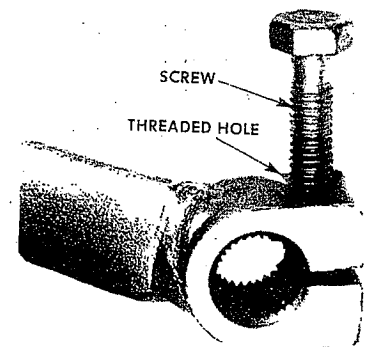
A hex-head or cap screw fits into threaded hole.
